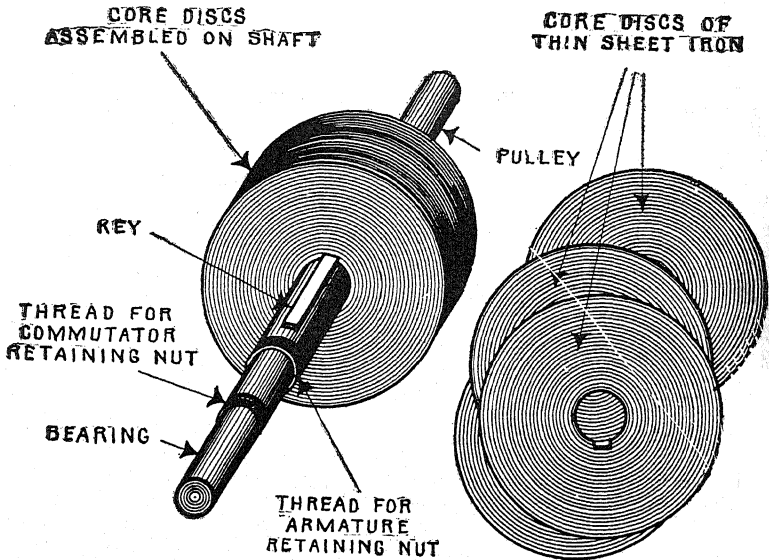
and 782.—Laminated smooth core armature partly assembled. *It consists of numerous discs of thin sheet iron threaded on the shaft and pressed together by end plates. The object of this construction is to prevent eddy currents.
